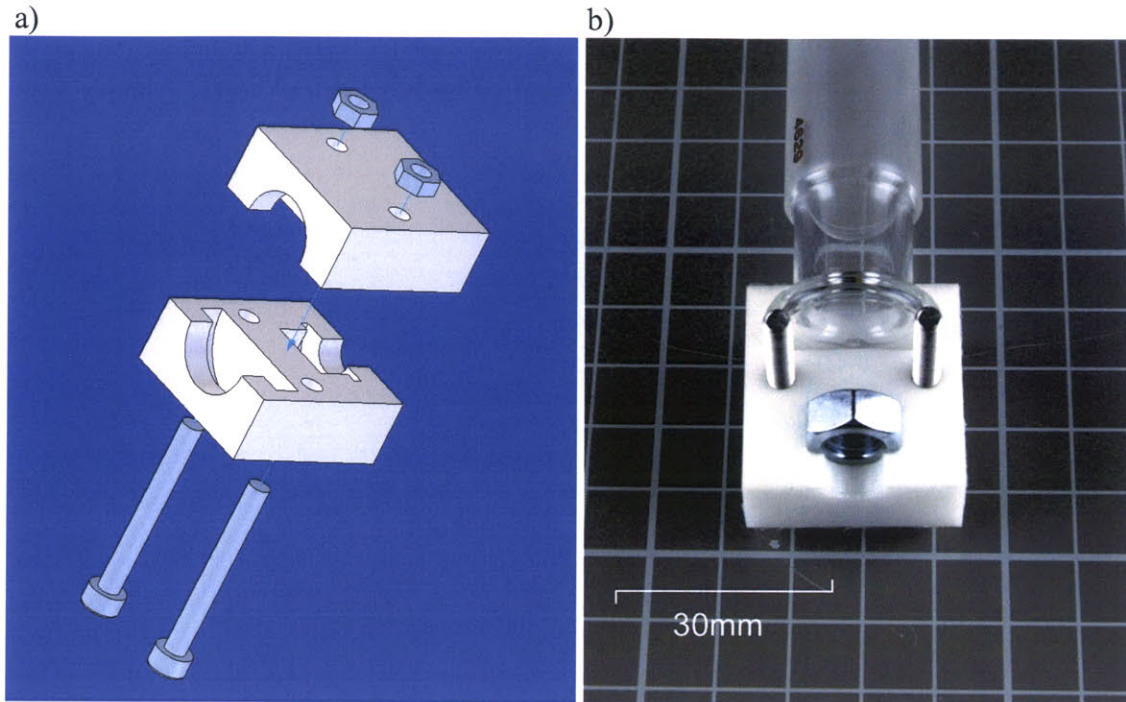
a) CAD Assembly of syringe-actuator coupler; b) Machined Delrin components of syringe-actuator coupler.
